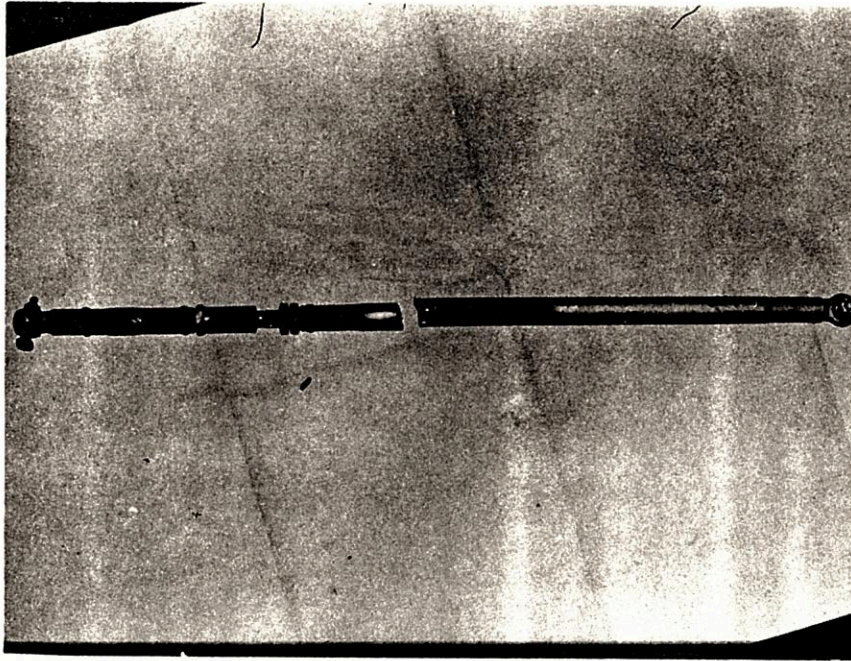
FAILED THRUST REVERSER ACTUATOR TUBE
